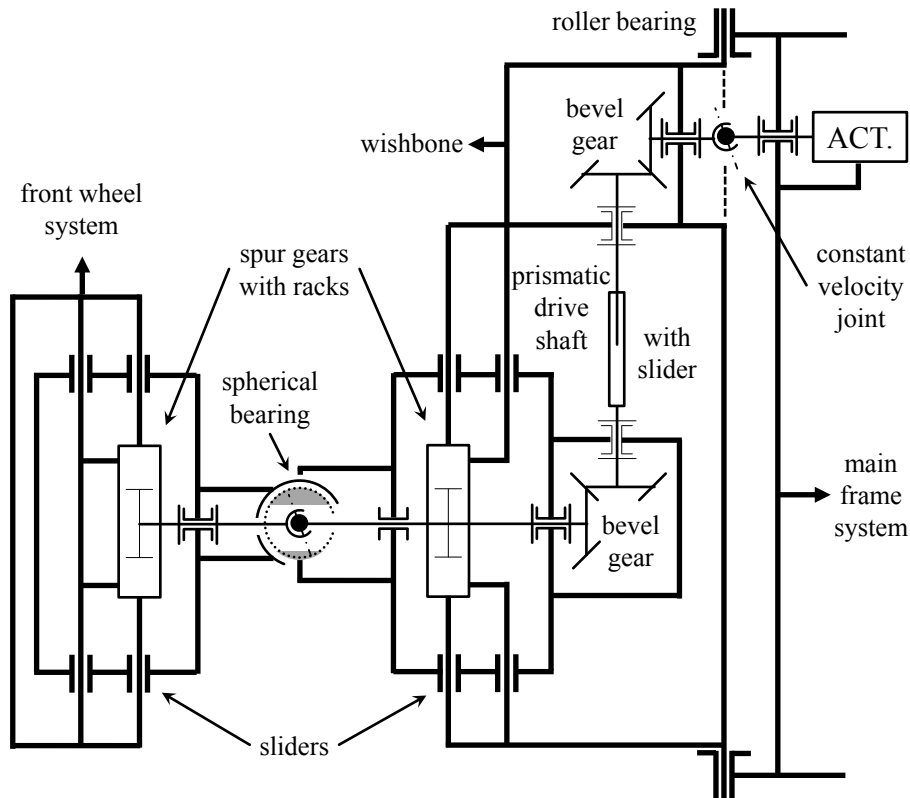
Adjustment of a single spherical bearing on a wishbone with a floating drive shaft and a prismatic drive shaft with slider that allows to place the actuator fixedly on the main frame side (suitable for all KC 1-7, AC 2)
